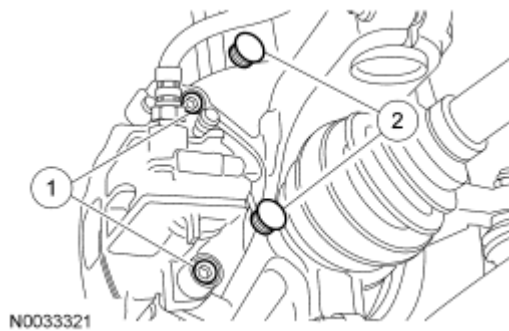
Identifying Caliper Bolts And Bolt Covers
